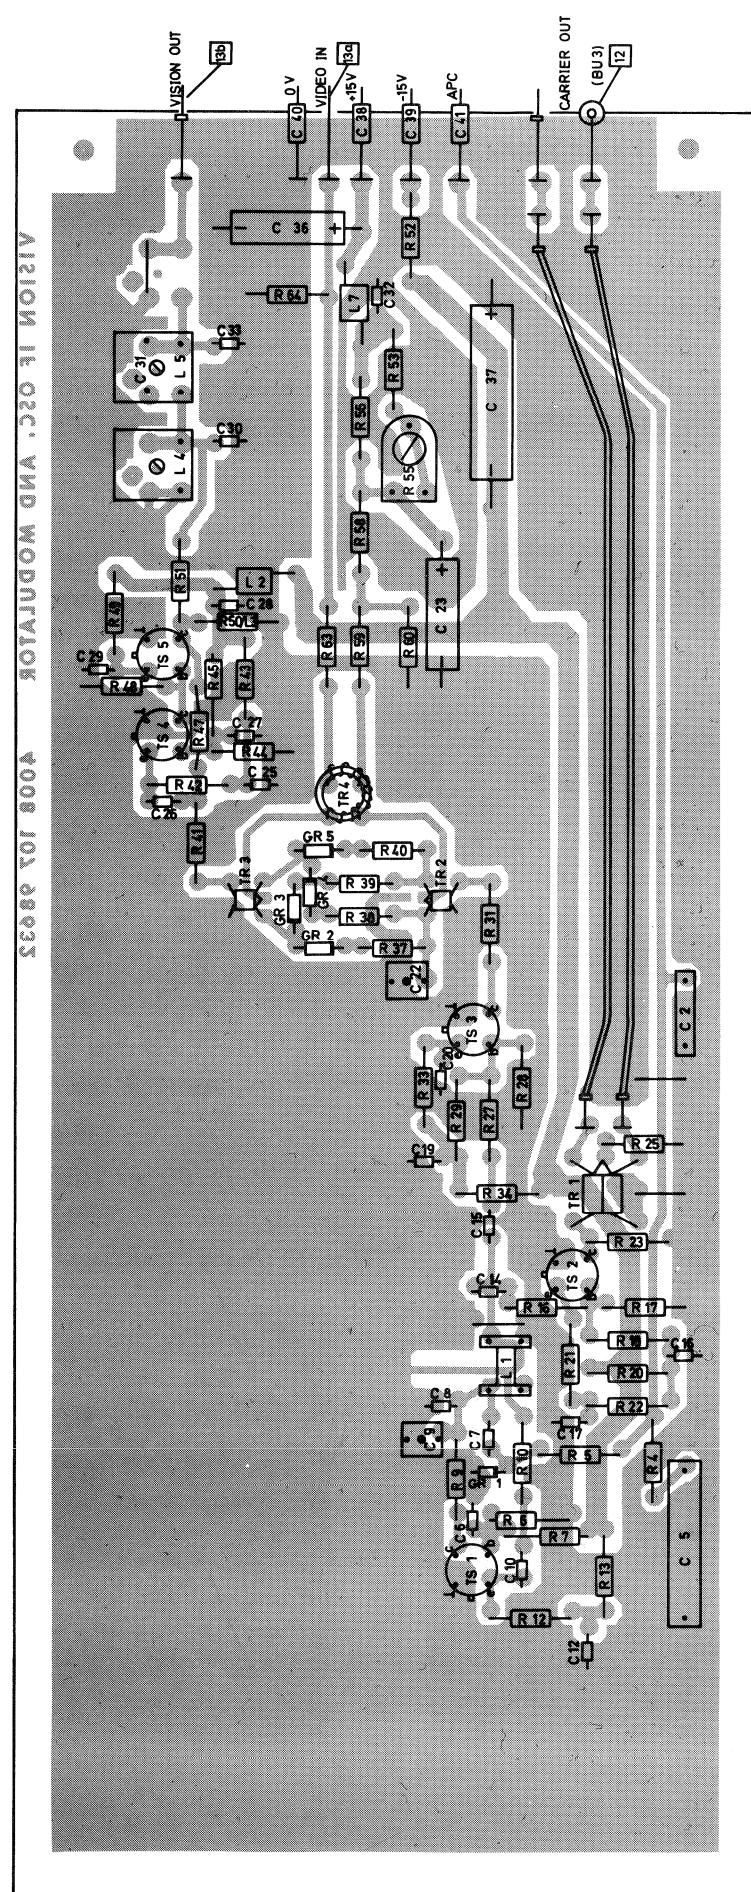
Printed wiring board, vision IF osc. and modulator, unit 4
